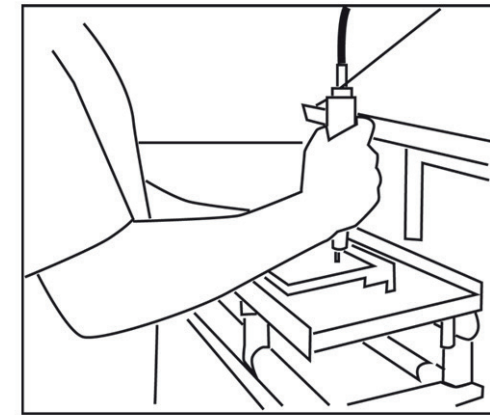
Prototype 1, with raised edge at the front causing forearm discomfort.
